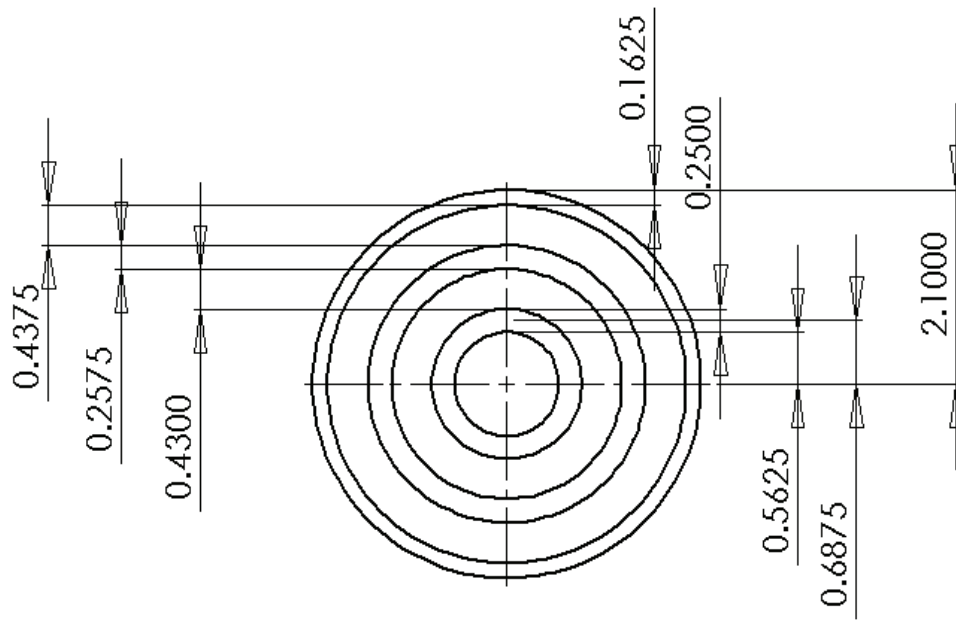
Mechanical Drawing of the inside view of the part *left dummy hub.sld
